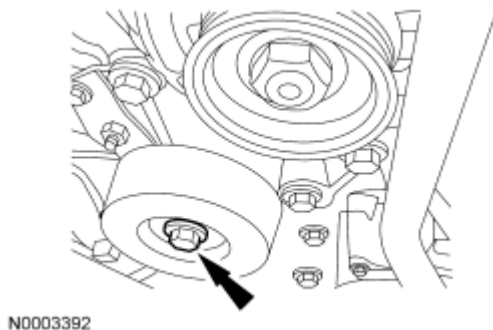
Locating Accessory Drive Idler Pulley Bolt
